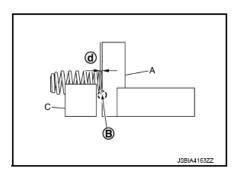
Checking Valve Spring Squareness Using Try Square Courtesy of NISSAN NORTH AMERICA, INC.
